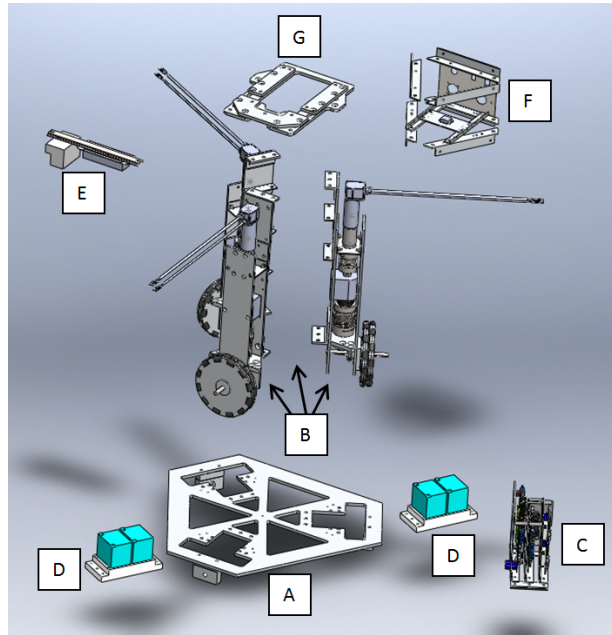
Exploded view of Trikey main modules. See Table 3.2 for details.
